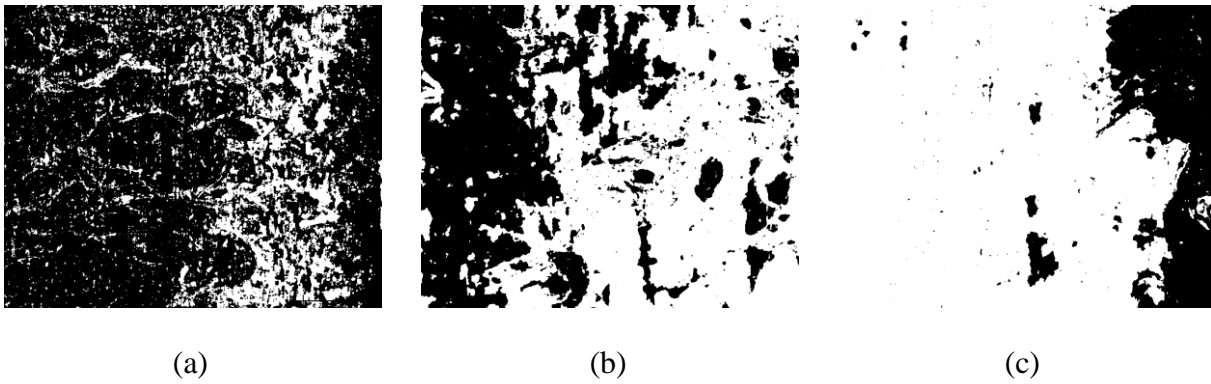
Fracture surfaces (imaged at 5X) of PAA+EC3901 (RT) SLS test coupon tested after exposure to hot-humid environment (a) 0 day with 73% cohesive fracture area, (b) 7 days with 43% cohesive fracture area and (c) 30 days with 16% cohesive fracture area
